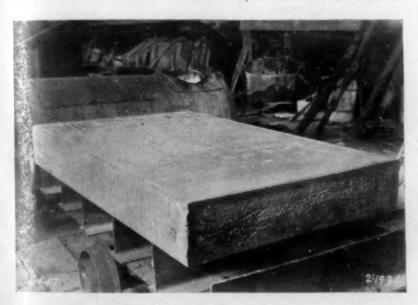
Copper Stool Showing the Smooth Surface Obtained by Casting in a Water-Cooled Mold.
